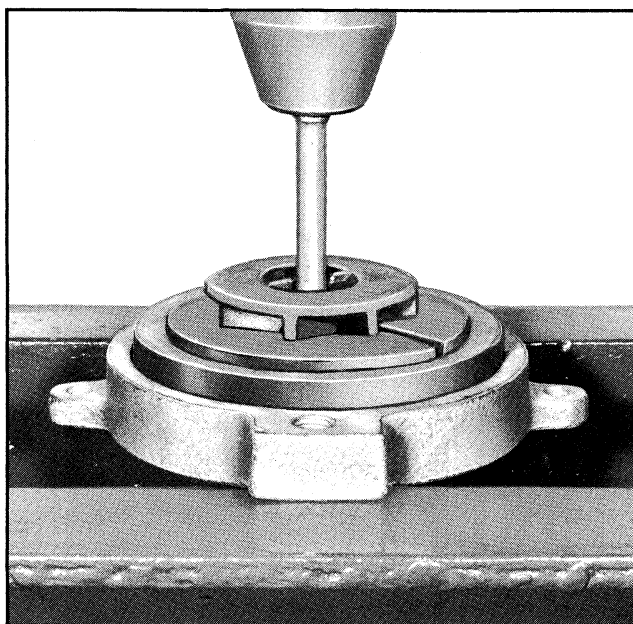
A-21 Pressing Shaft and Bearing Out of Impeller
